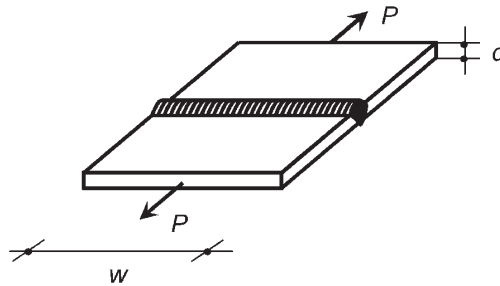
Illustration of loading conditions perpendicular to the weld. Copied from [9].
